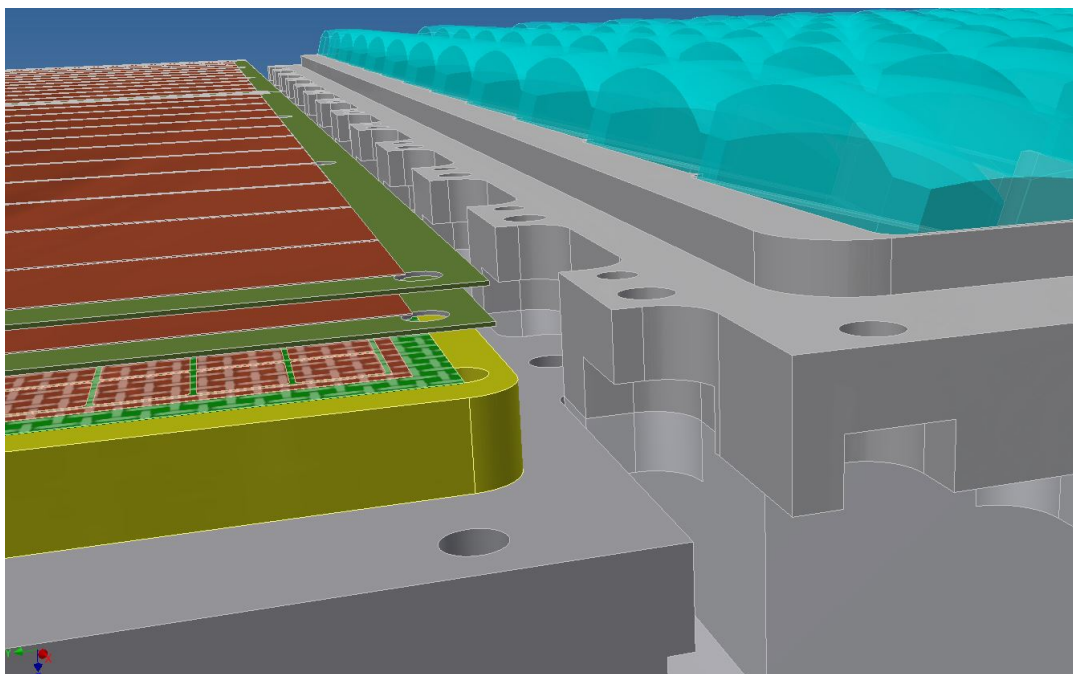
Exploded view of Hybrid detector and the section of MAPMT in CAD
